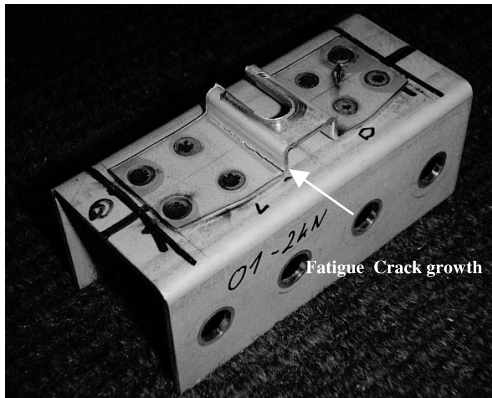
Fatigue crack at root region of holder ($t = 1.5$ mm)
